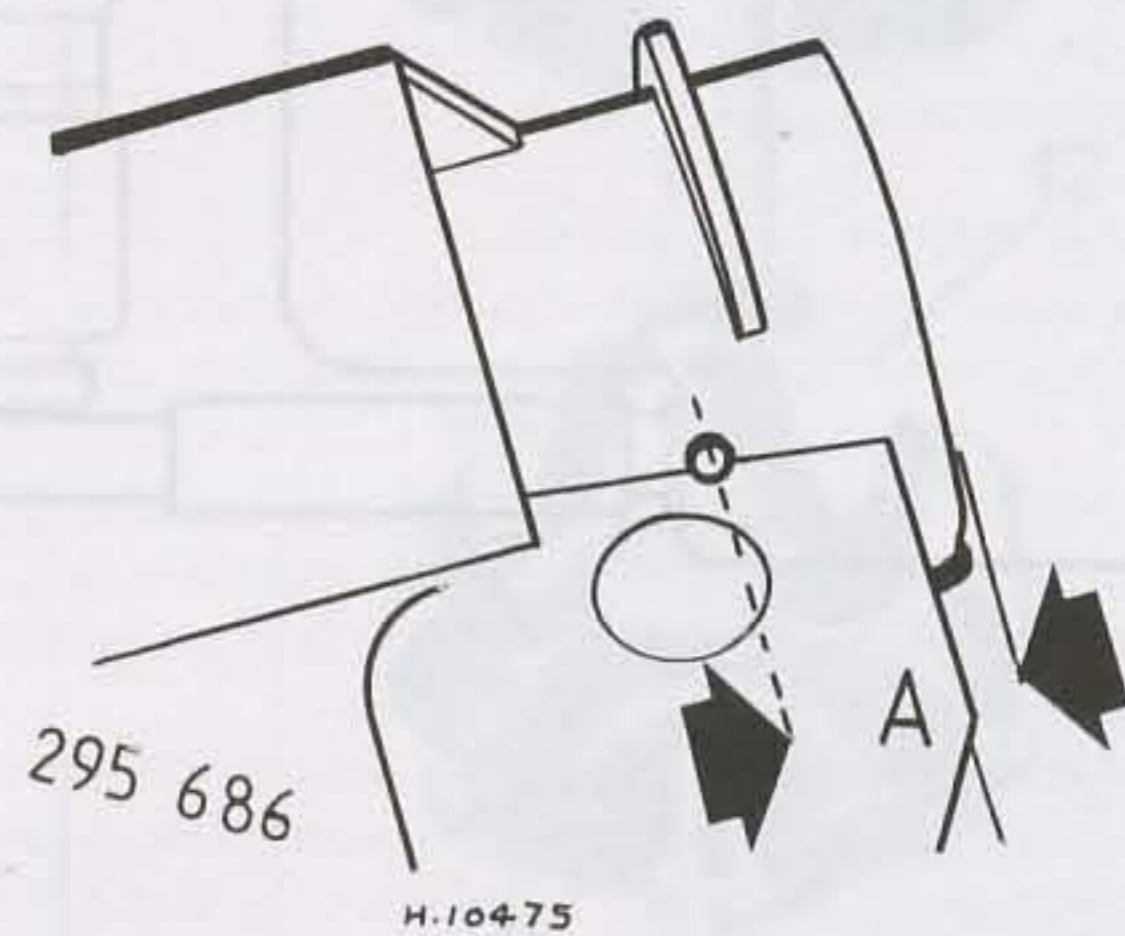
STEERING COLUMN LOCK CYLINDER RELEASE HOLE DRILLING DIAGRAM
